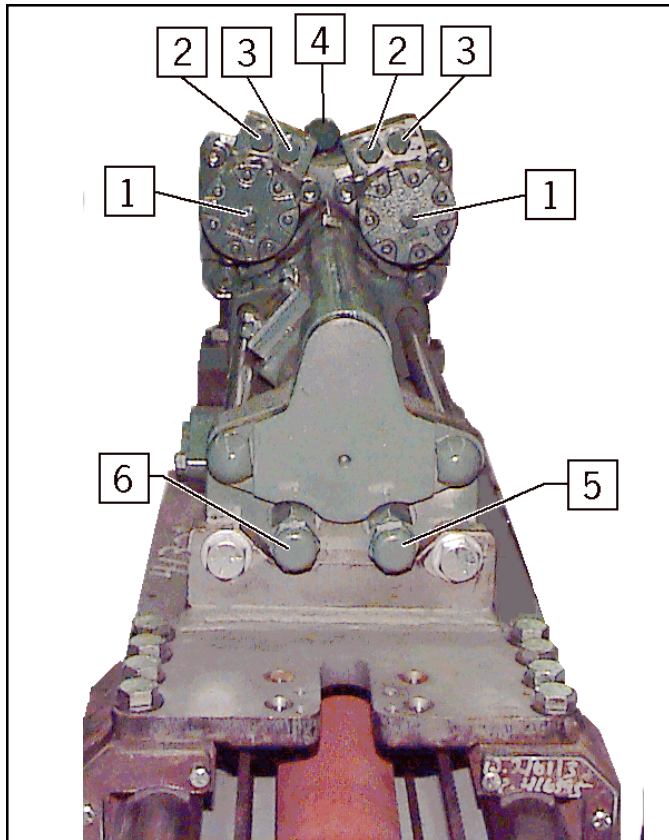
HPR3818 (HPR1H-ATW) Drill Hose Connections
